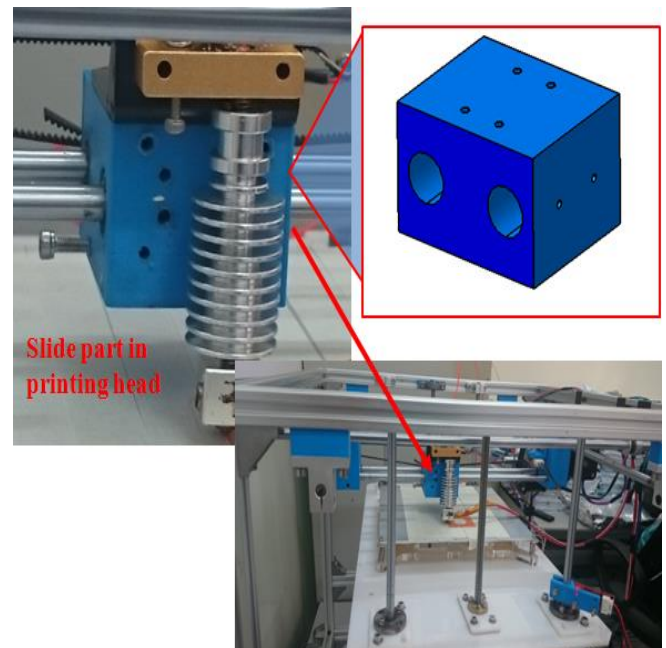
Parts of the printing head printed by the 3D-FDM printer
